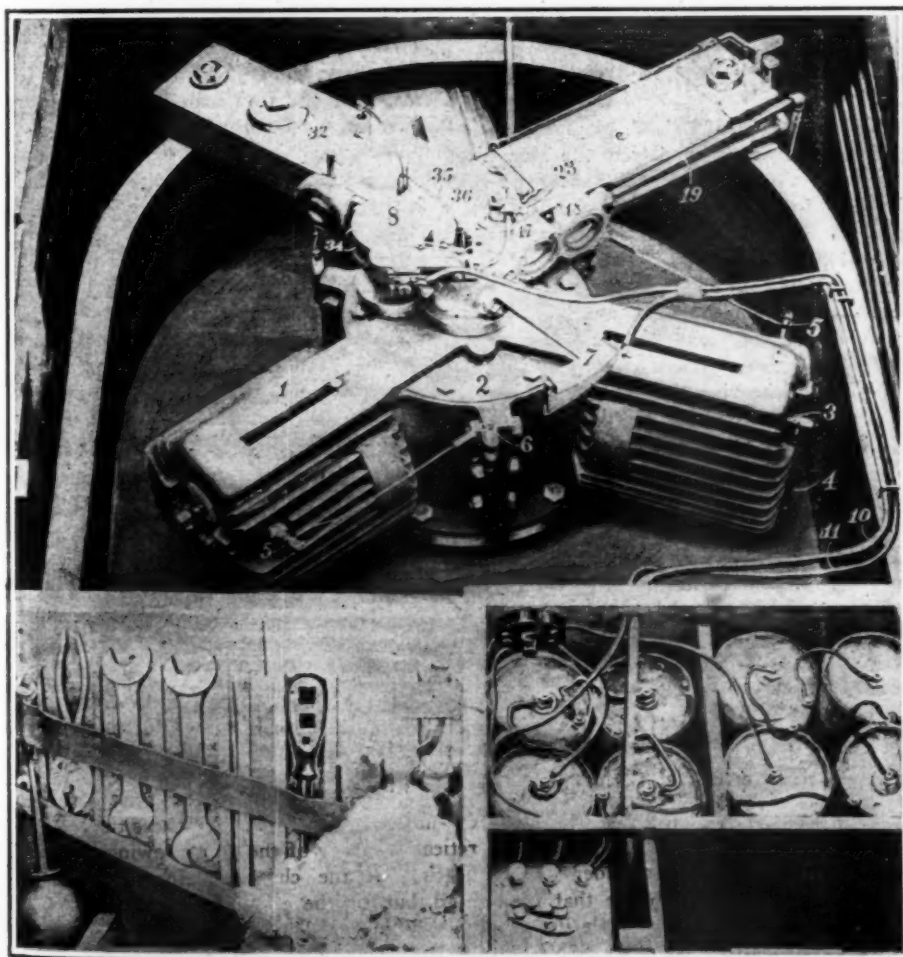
PHOTOGRAPH OF MOTOR IN PLACE SHOWING METHOD OF PIPING AND WIRING.
